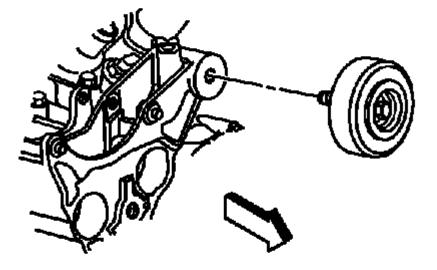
View Of Right Drive Belt Idler Pulley Courtesy of GENERAL MOTORS CORP.
